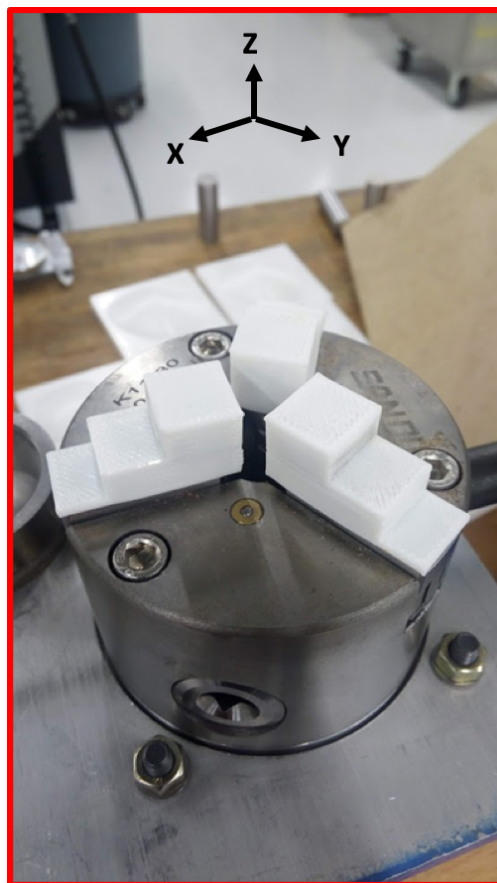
Flexible gripper inserts mounted on rotary chuck jaws (robot end-effector frame X, Y, Z).
